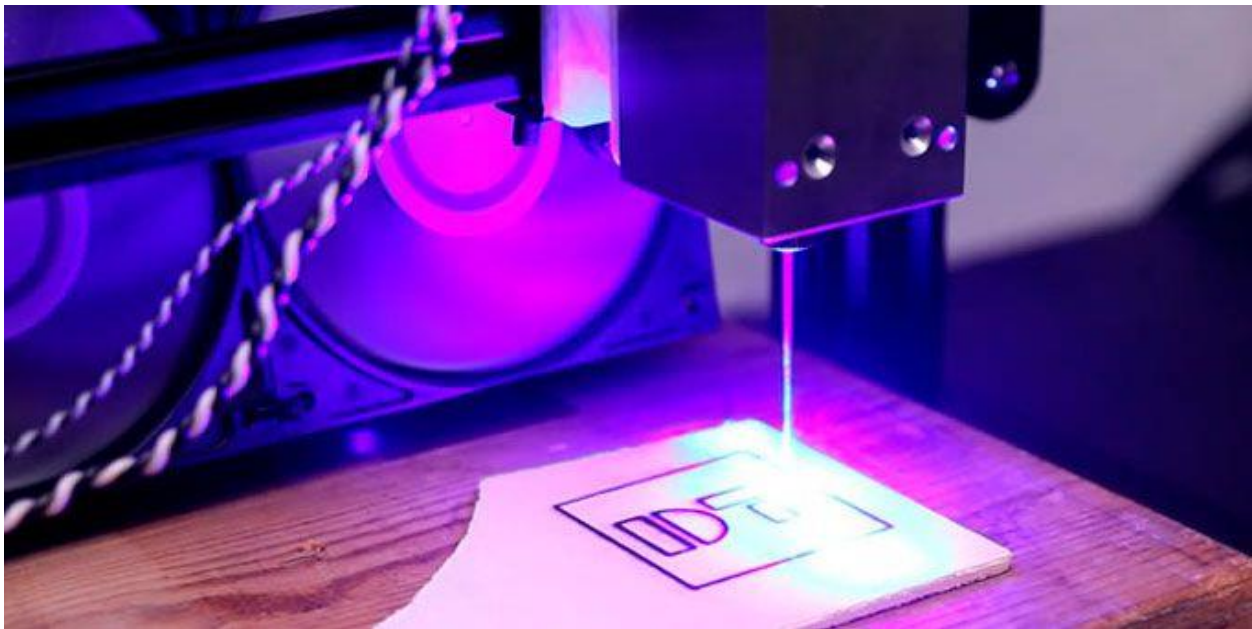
Example of the amount of laser beam emitted from a laser diode for drawing on parts
